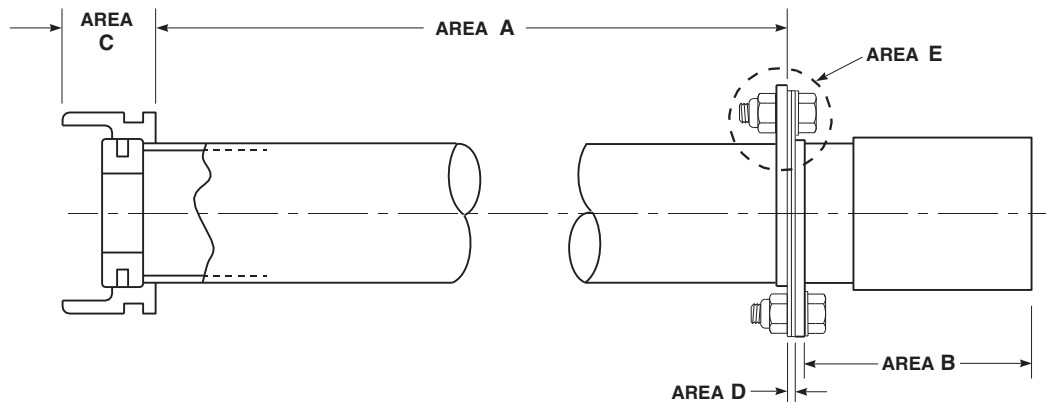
REPLACE BLADE DEICE TUBE ASSEMBLY AND PACKING
